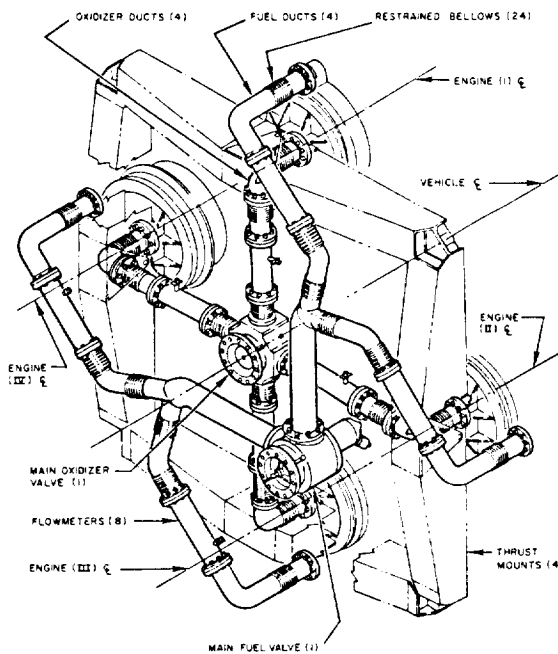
Propellant ducting and mounting arrangements for a cluster of four storable-propellant pressure-feed engines.
